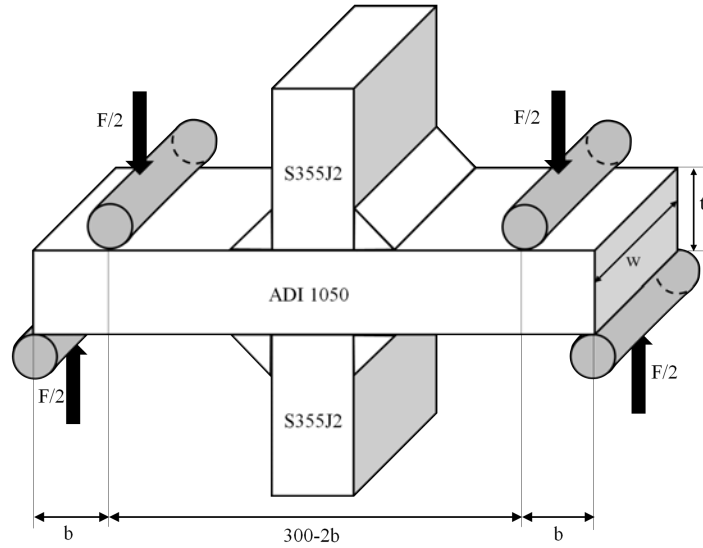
Geometry of the cruciform nlc fillet-welded joints under bending load
